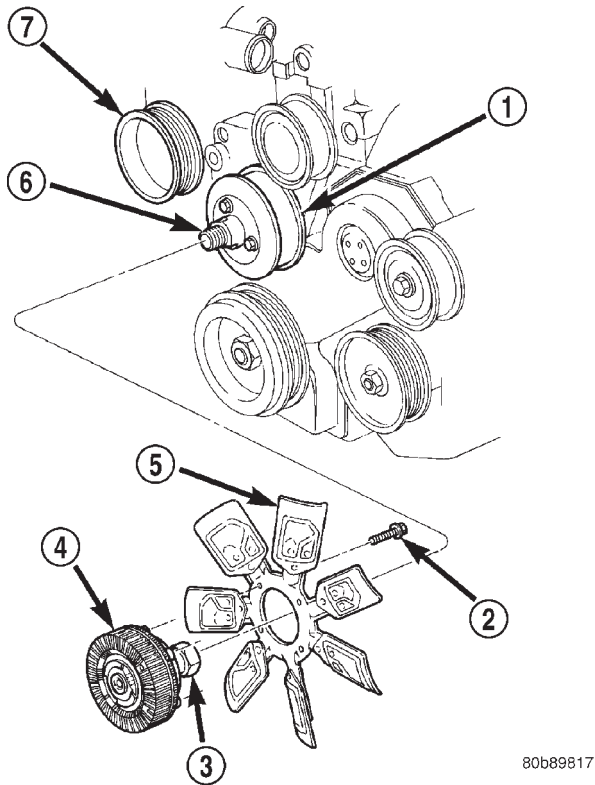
Thermal Viscous Fan Drive and Blade Assembly
